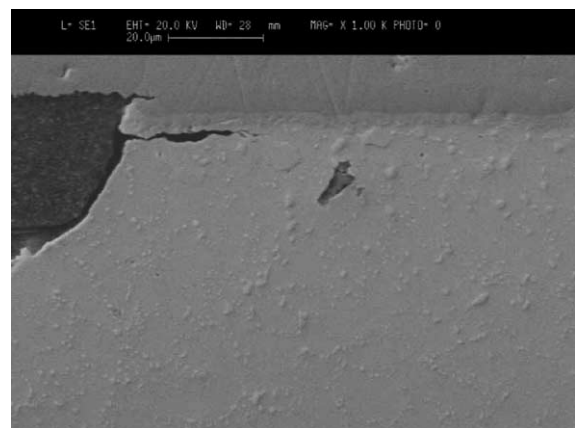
Crack initiation after 1000 thermal cycles (0.2-mm stencil thickness, 235 °C reflow, 0.66-mm pad size).
